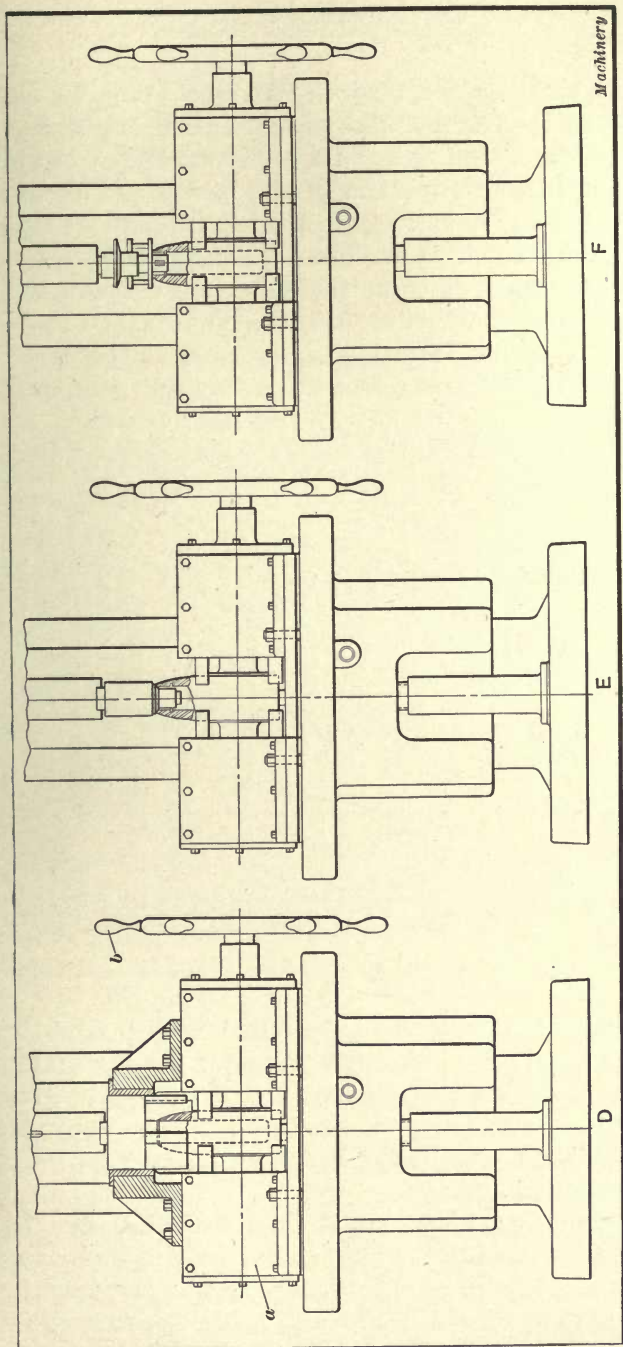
Turning, recessing and tapping High-explosive Shells on a High-power Drilling Machine
